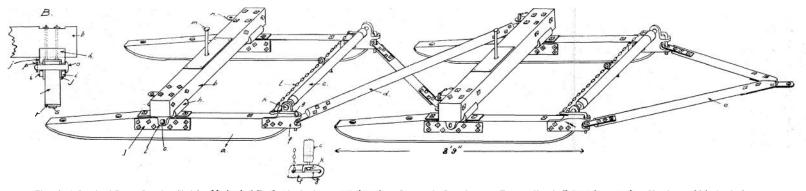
3 , A Lombard Patent Logging Sled for Mechanical Draft (the bunks are not shown), a. Runner. b. Cross-beam. c. Front roller.d. Cross-pole or reach, e. V-pole to which the draft power is attached. f. Runner nose casting, g. Bolt which fastens the cross-pole to "f." h. Knee casting, i. One of the two ears of the knee casting which fit over "j," the side plate of the runner. J. Side plate of the runner, k. Gudgeon pin, which is prevented from slipping out of the roller "c" by the bolt "g." 1. Chain 'which holds the bolts "g" in place. m. Kingbolt. n. Ear'of the casting to which the cross-poles "d" are attached. o. Pin holding the sled knee on the runner, p. Cotter pin for "0." r. Sled shoe. S. Keel on the sled shoe.
